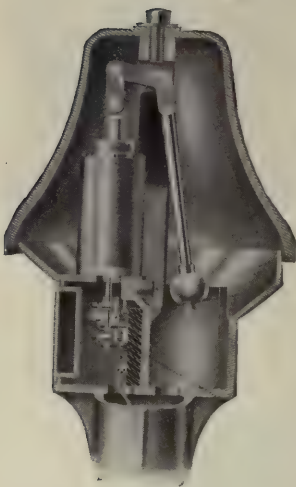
Sectional View of Locomotive Type Bell Mechanism.
